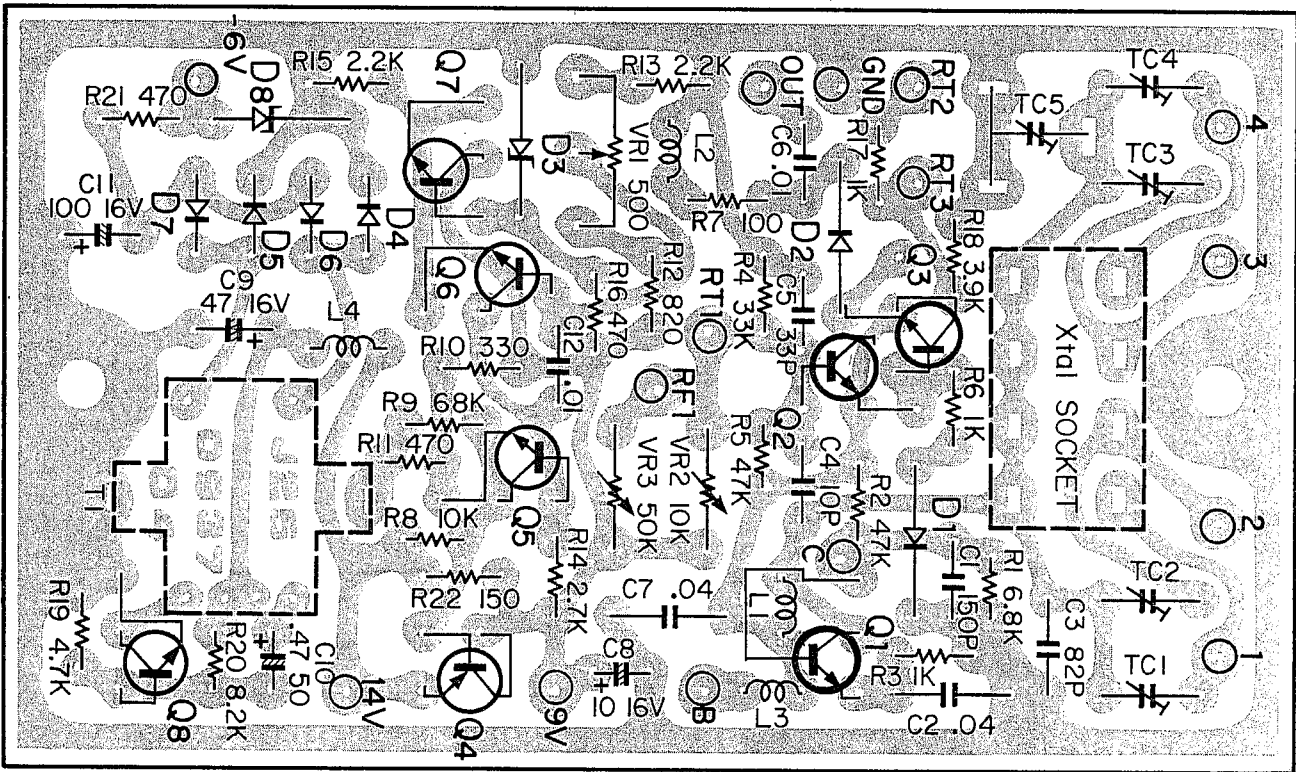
DRIVER COIL Board (X40-0017-01) Diagram
